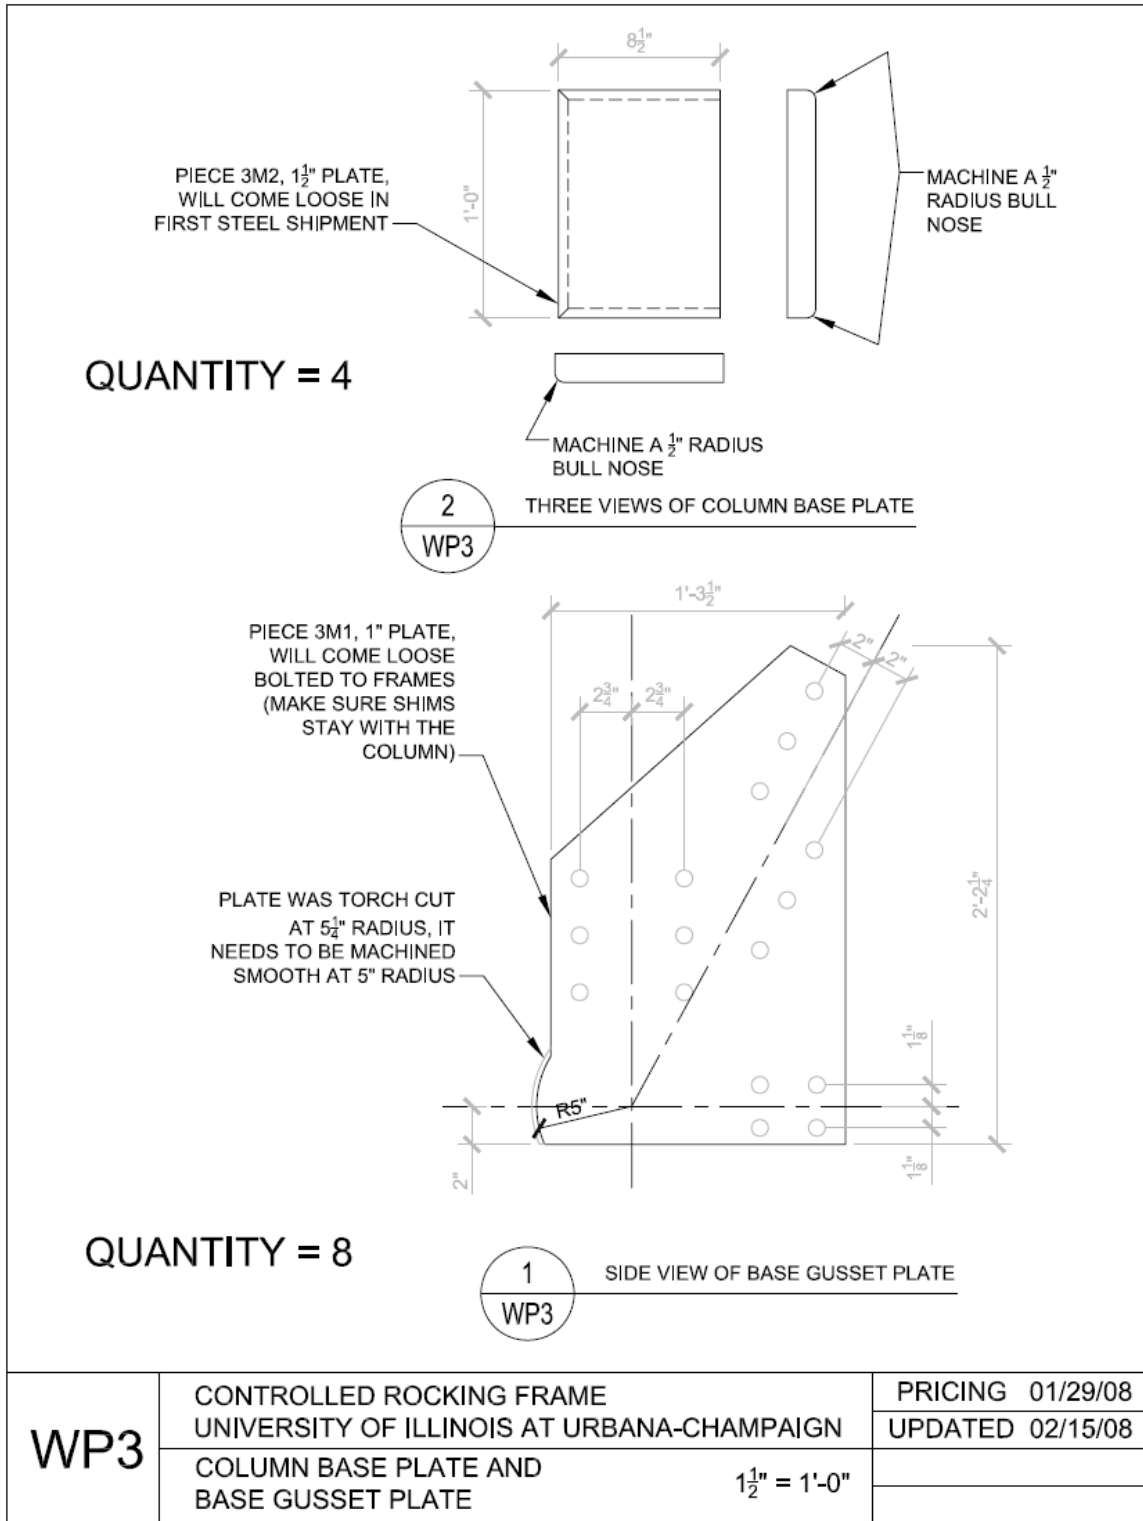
Work Plan Drawing – Column Base Plate and Base Gusset Plate
